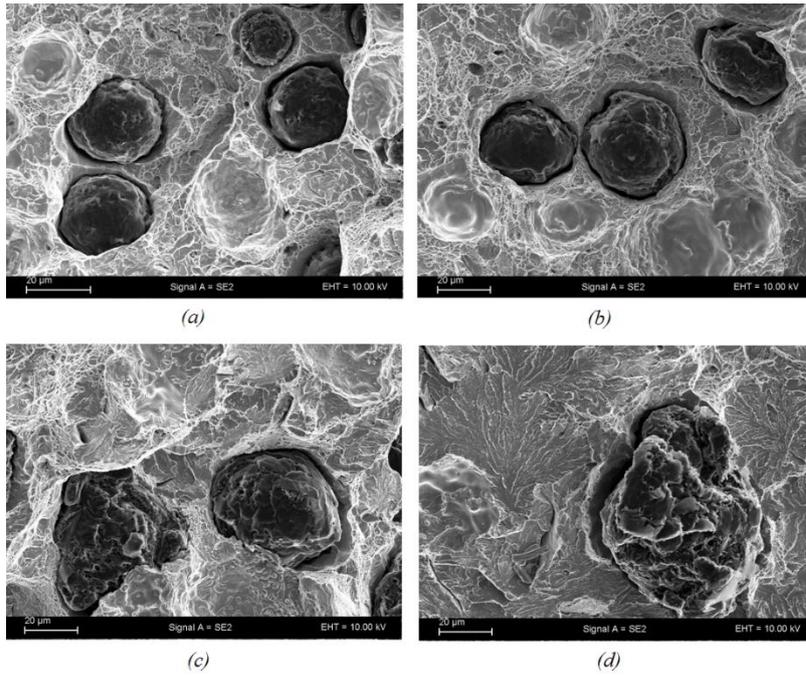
Fracture surfaces of ADI-2 samples at (a) 10 mm, (b) 45 mm, (c) 90 mm and (d) 150 mm depth starting from the chilled side.
